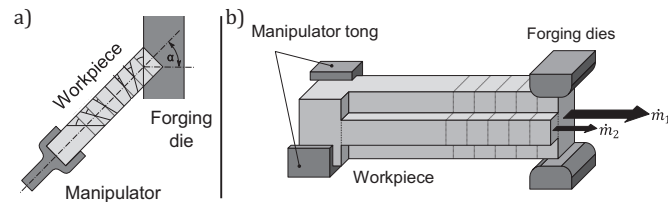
(a) Transverse stretch forging [6] and (b) forging of a workpiece with profiled cross section according to [7].
